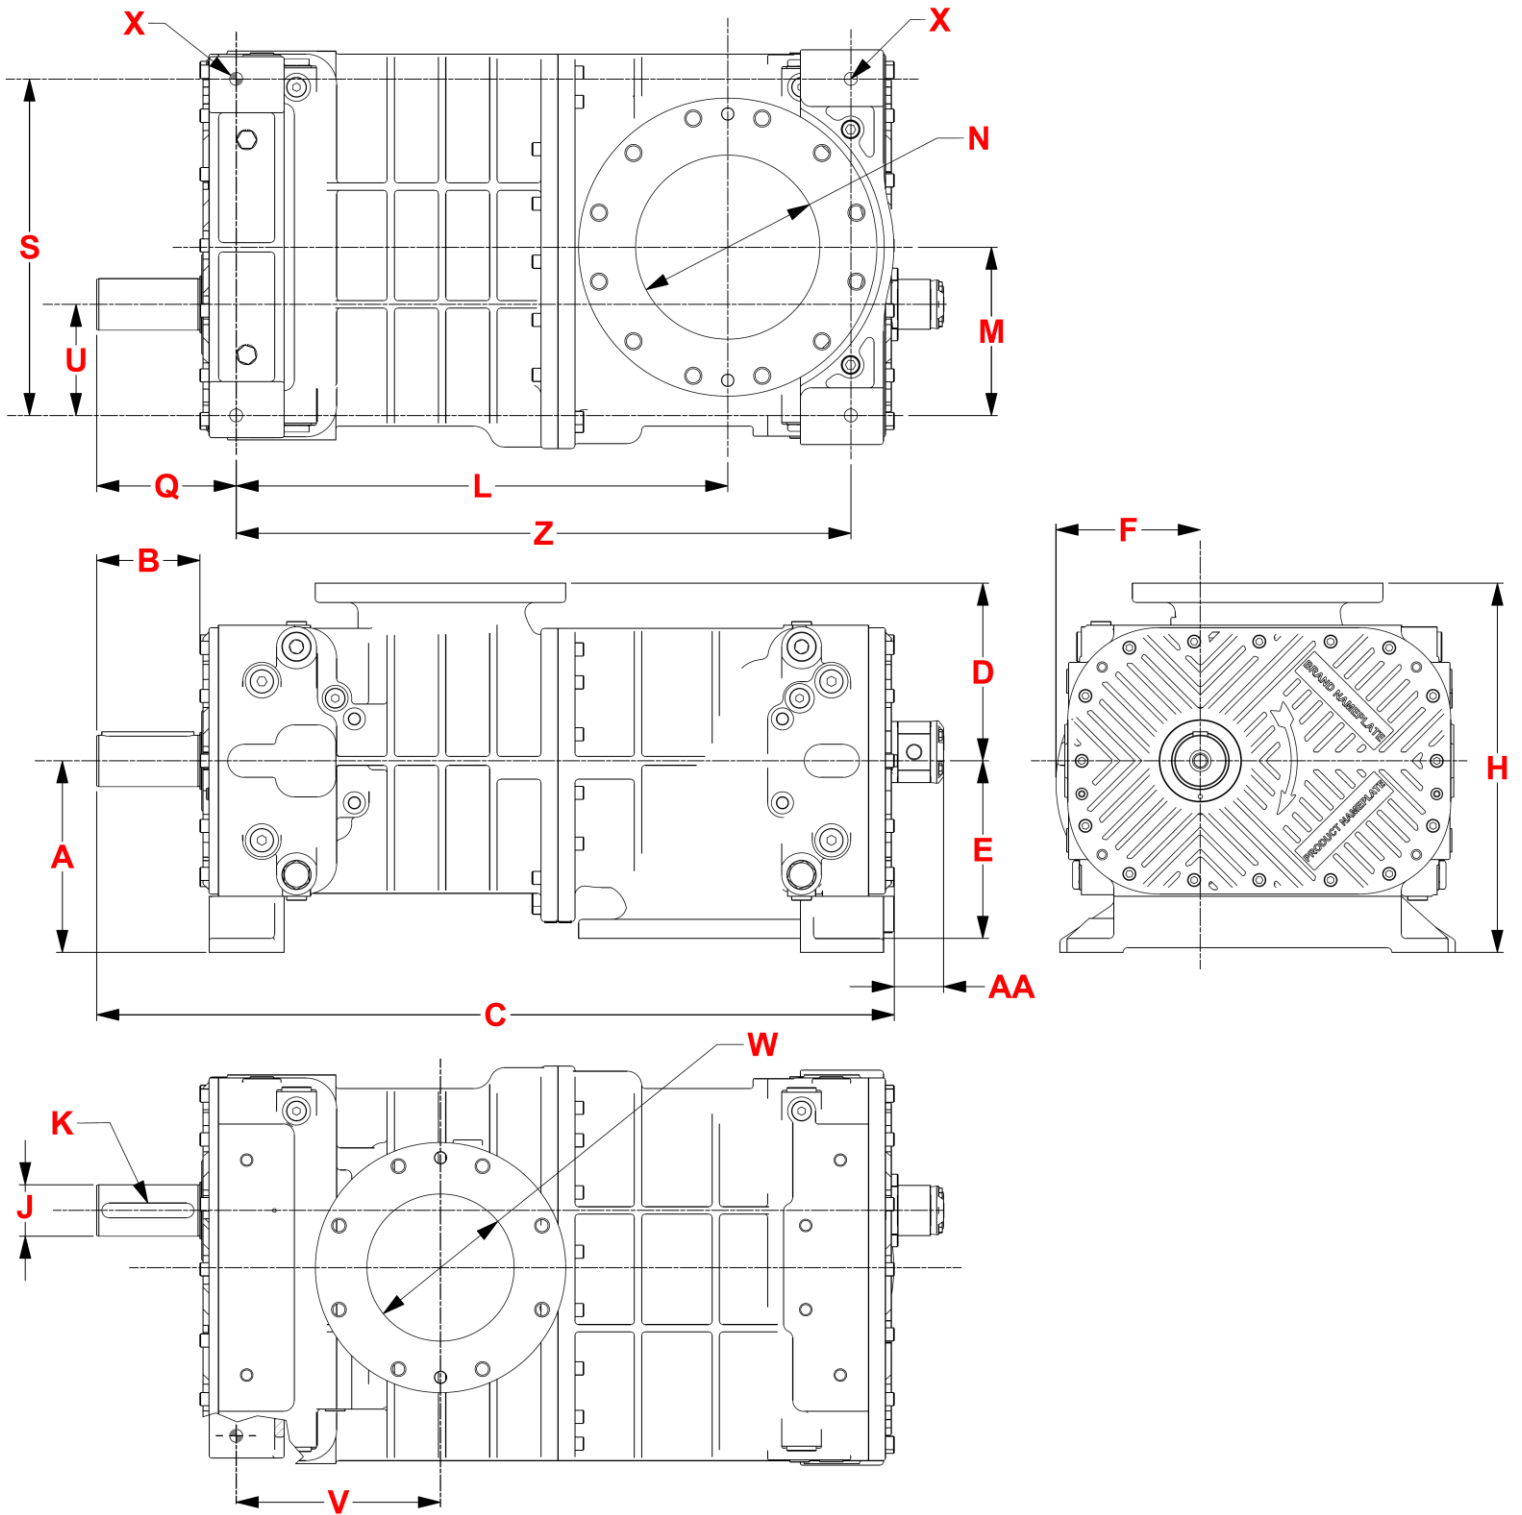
TOP DISCHARGE OUTLINE DIMENSIONS
